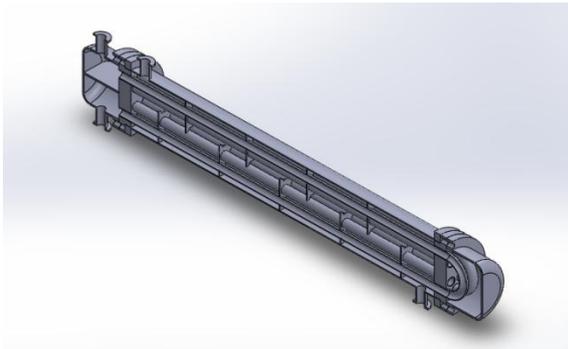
Isometric view of shell and tube heat exchanger
